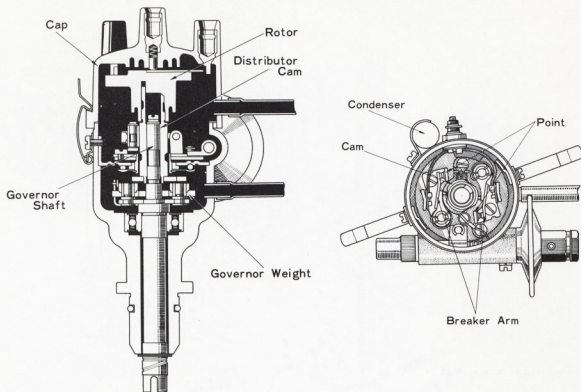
Distributor Cross Sectional View G0338, G0339
